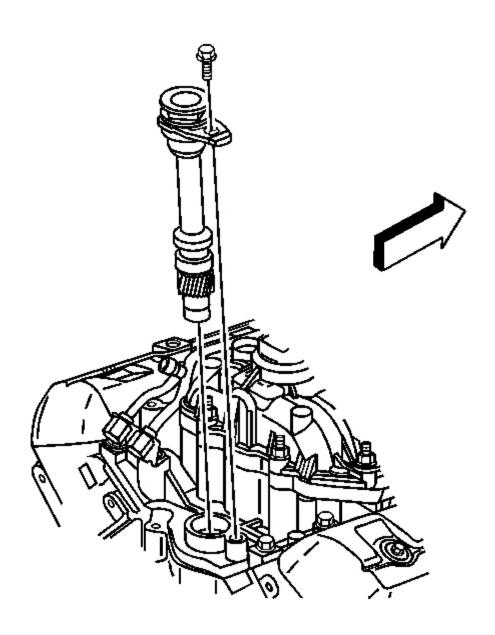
View Of Oil Pump Drive Shaft Courtesy of GENERAL MOTORS CORP.
